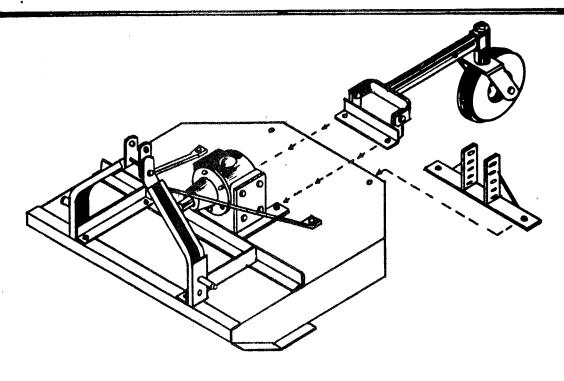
Assembly of 3 Pt. Pickup Type Machine
